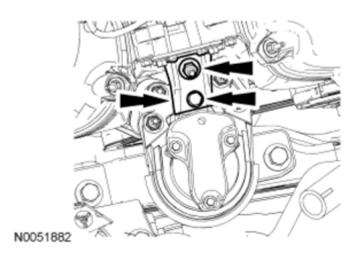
Locating Engine Mount Brace Nut And Bolt Courtesy of FORD MOTOR CO.
